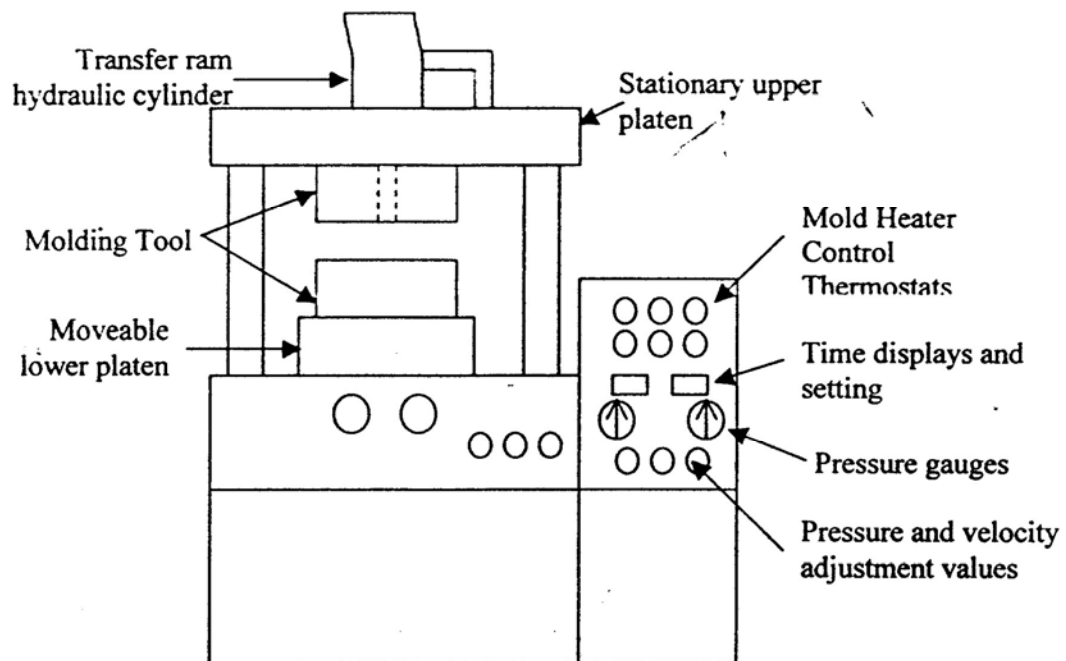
Schematic of a transfer molding machine (Manziona, 1990)
